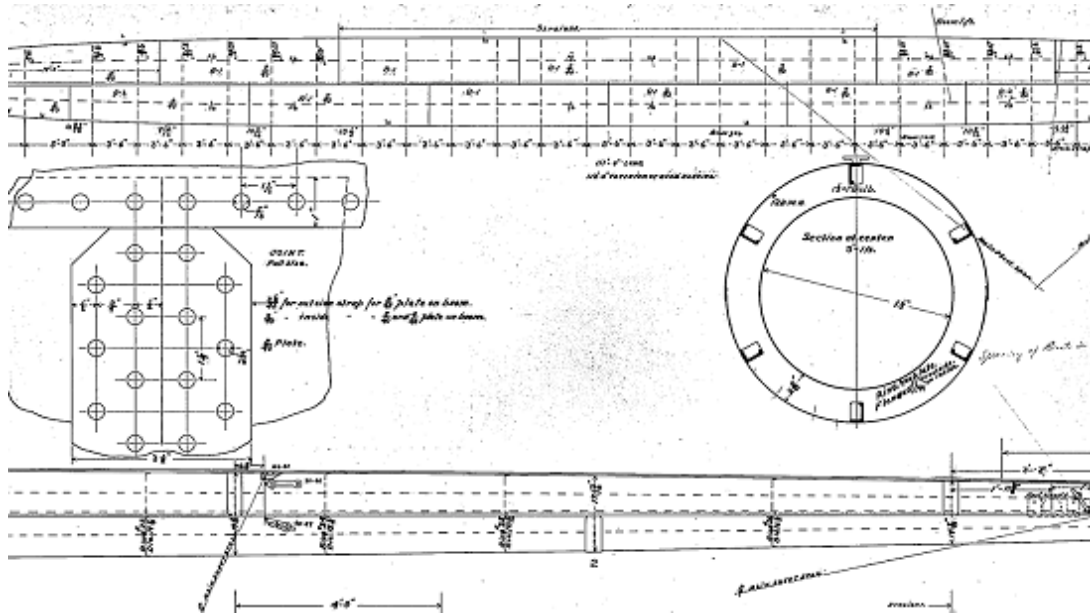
RELiance Boom, showing flanged rings, Stringers with bulbs and plating/ riveting plans. HMCo Dwg. 86-128. Courtesy Curator, Hart Nautical Collections, MIT Museum
